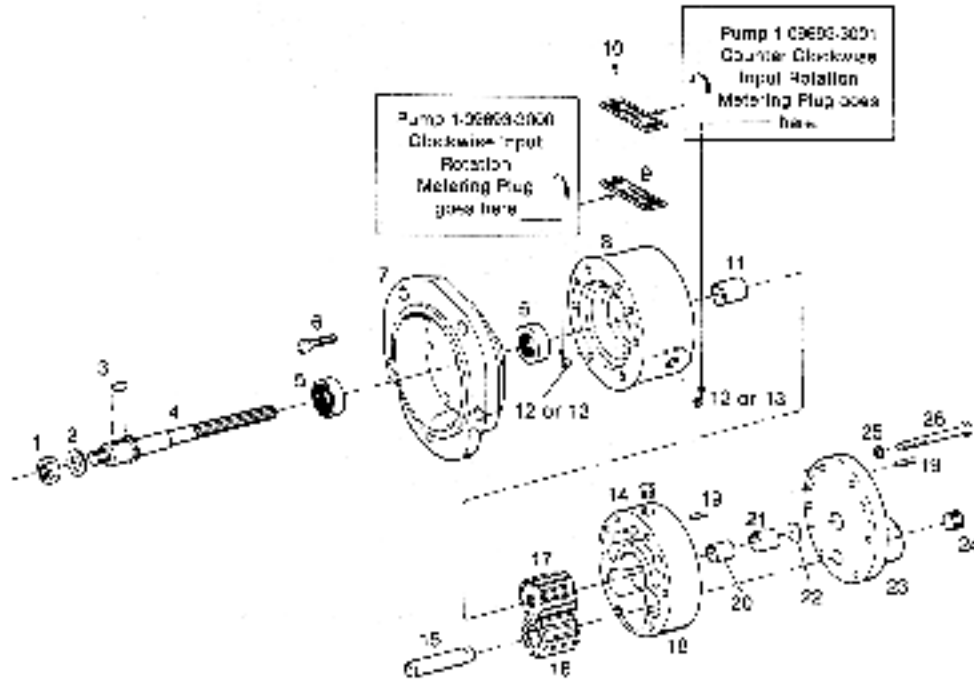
D. Single Pump Assembly, Direct Engine Mounted
